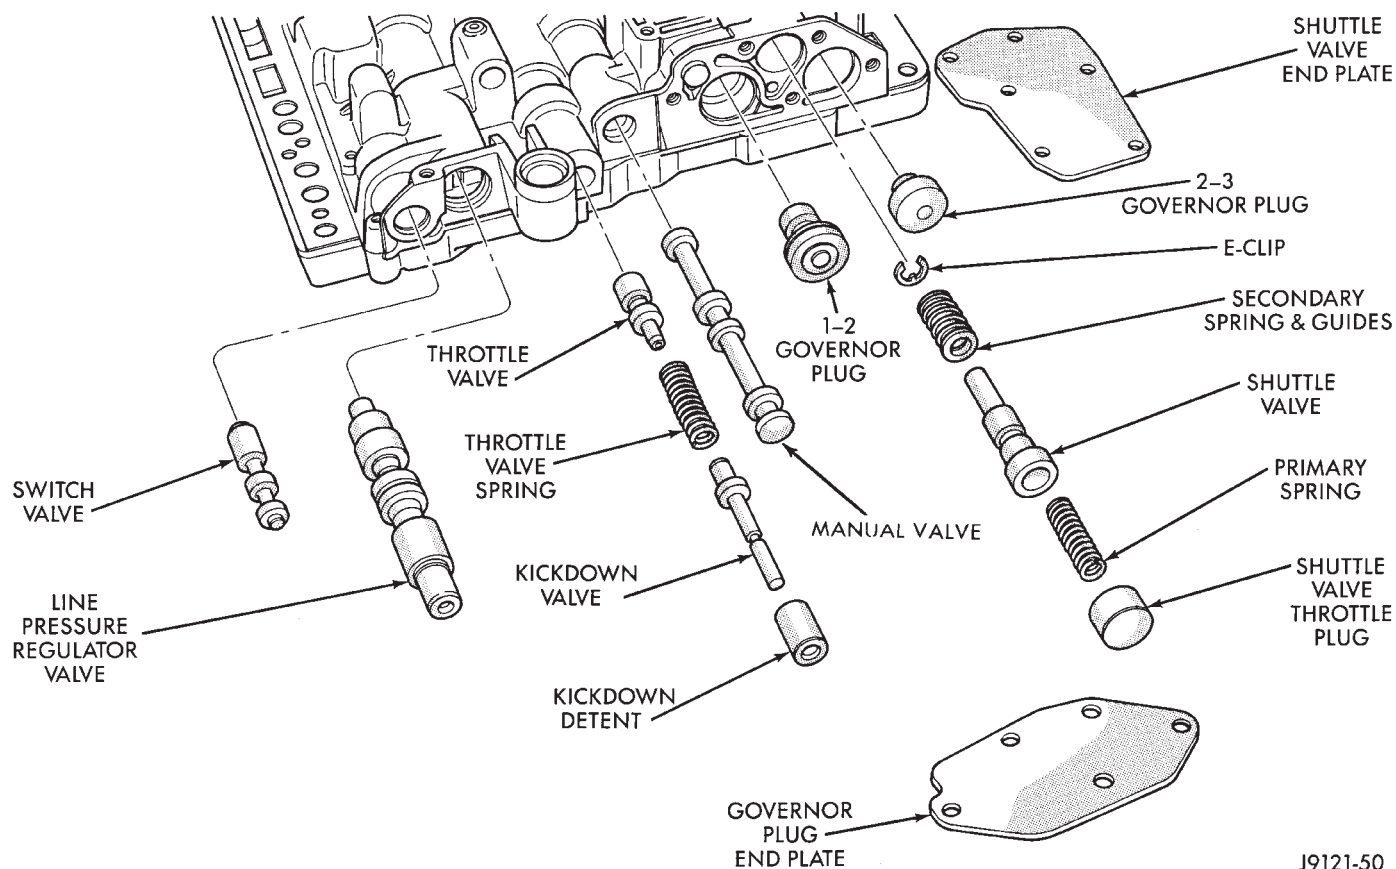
Shuttle Valve E-Clip And Secondary Spring Location
